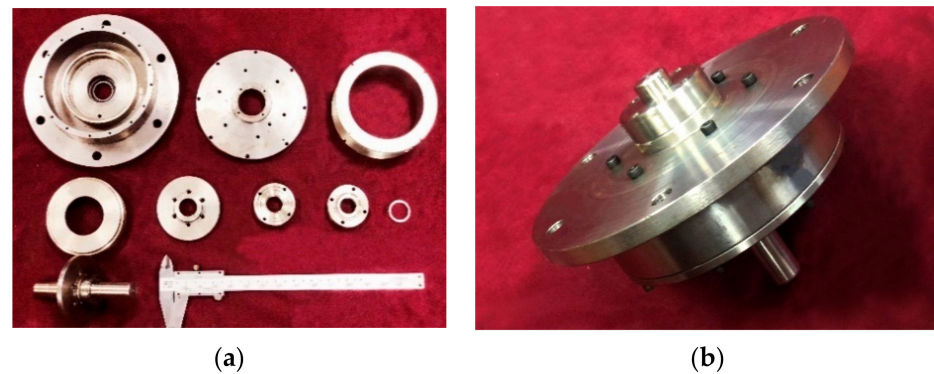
Prototypes of MR brake. (a) Components and (b) prototype.
